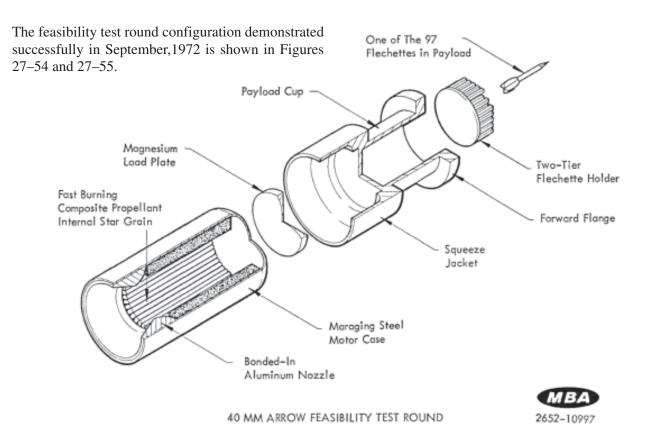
Arrow components. MBA drawing from MB-R-72/72.
